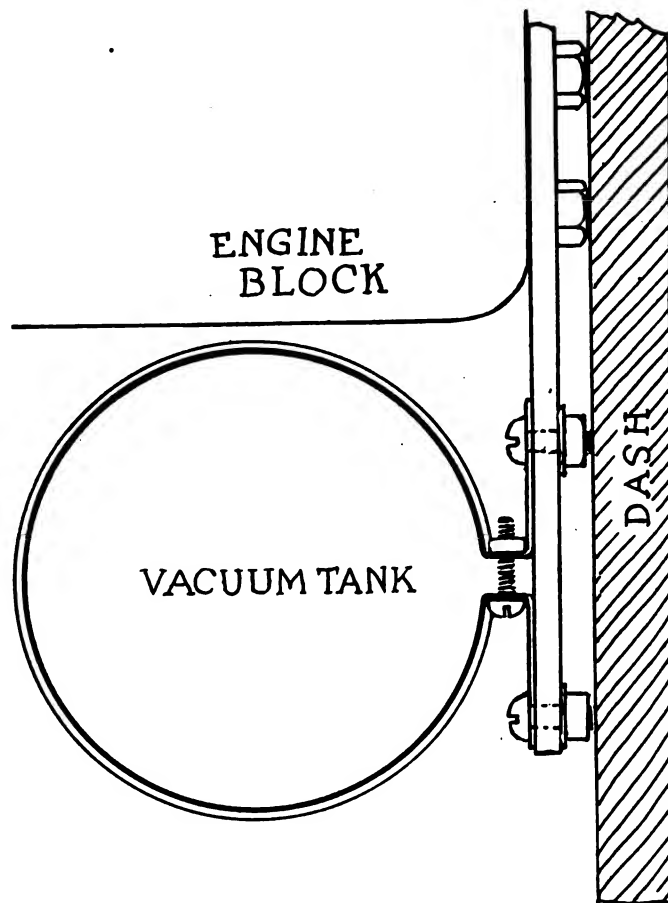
AN EXAMPLE OF HOW THE DASH-BOARD INTERFERES WITH ATTEMPTS TO REMOVE THE VACUUM TANK
